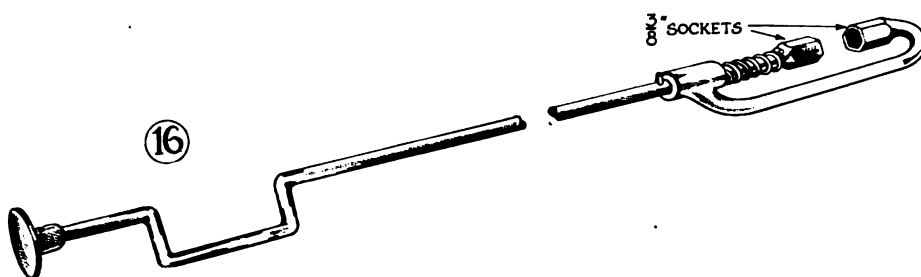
Jew socket wrench for removing the crankcase bolts. This method is even faster than the knee wrench and speeder as the spring holds the lower socket up against the bolt head
